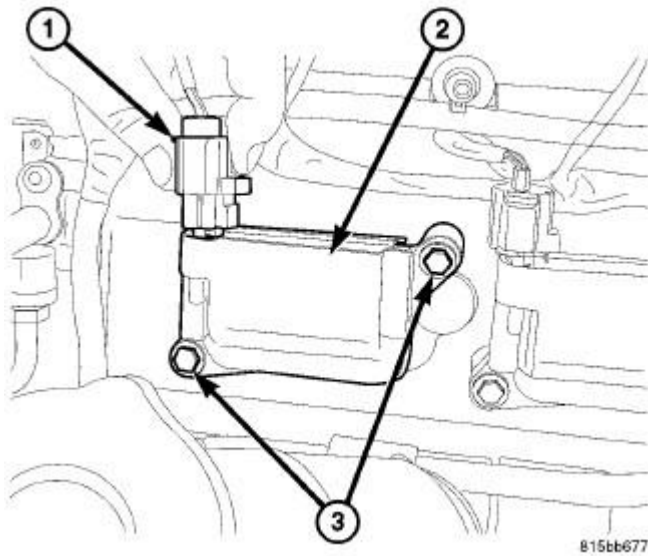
IGNITION COIL MOUNTING BOLTS - 6.1L
